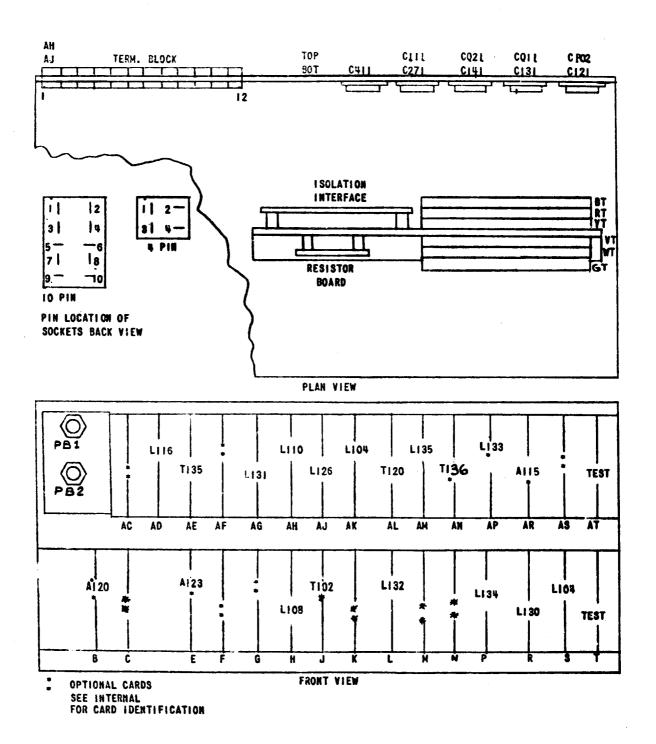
(0275A3266-0) Component Location Diagram for the Type SLA55B Relay
